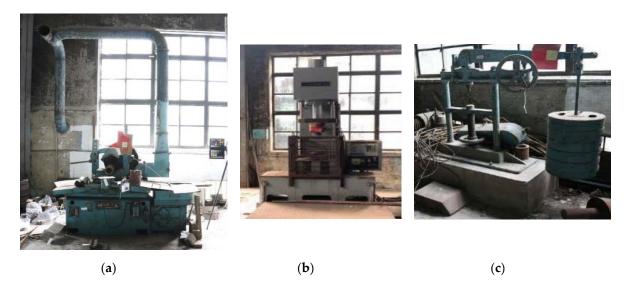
Post-processing and testing. (a) Grinding machine (A06), (b) spring tester (A04), (c) Vickers hardness tester.
